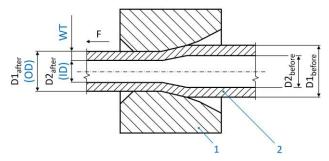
Schematic representation of sinking (i.e., cold drawing of a seamless steel tube without a plug): $D1_{before}$ – outer diameter before drawing, $D2_{before}$ – inner diameter before drawing, $D1_{after}$ – outer diameter after drawing, $D2_{after}$ – inner diameter after drawing, WT – wall thickness, F – drawing force, 1 – drawing die, 2 – drawn tube
